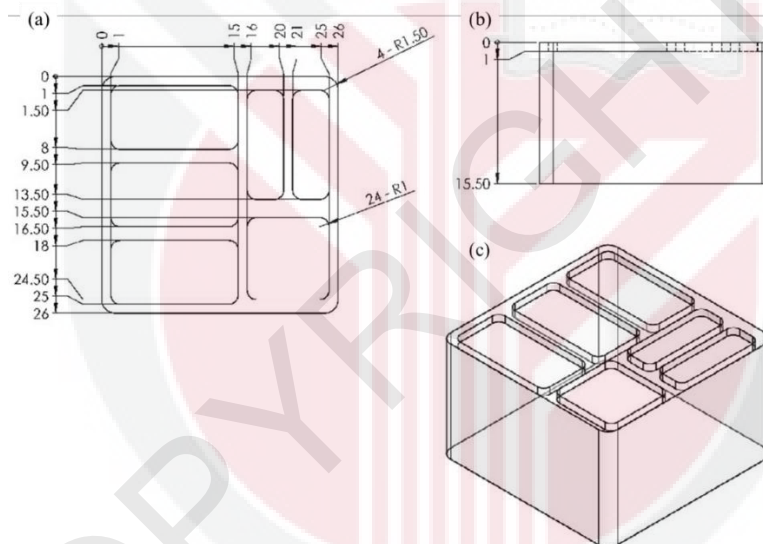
Dosimeter holder (D7): (a) Top view, (b) side view, (c) orthographic view
